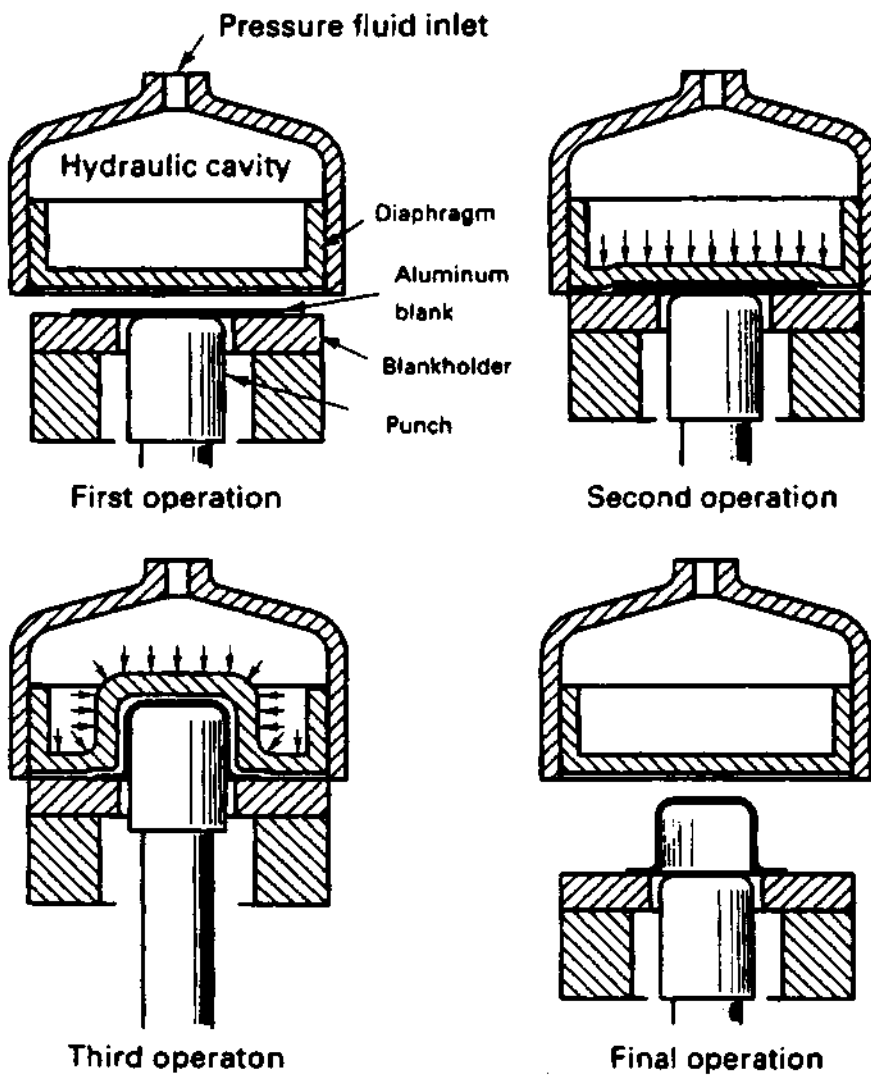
D3d A schematic view of the rubber diaphragm forming process (hydroform or fluid-forming process) showing: 1) the blank in place ready for forming, 2) the press closed and the cavity pressurized, 3) the ram advanced into the cavity and, 4) the pressure released and the ram and press retracted. (Courtesy Aluminum Association, Washington, DC)
